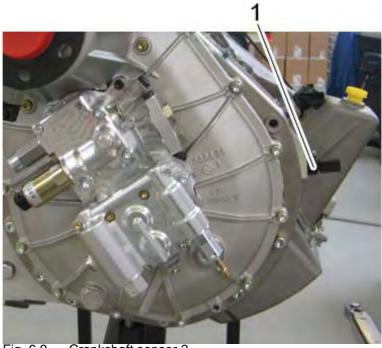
Crankshaft sensor 2 1 Crankshaft sensor FADEC B (2 of 2)
